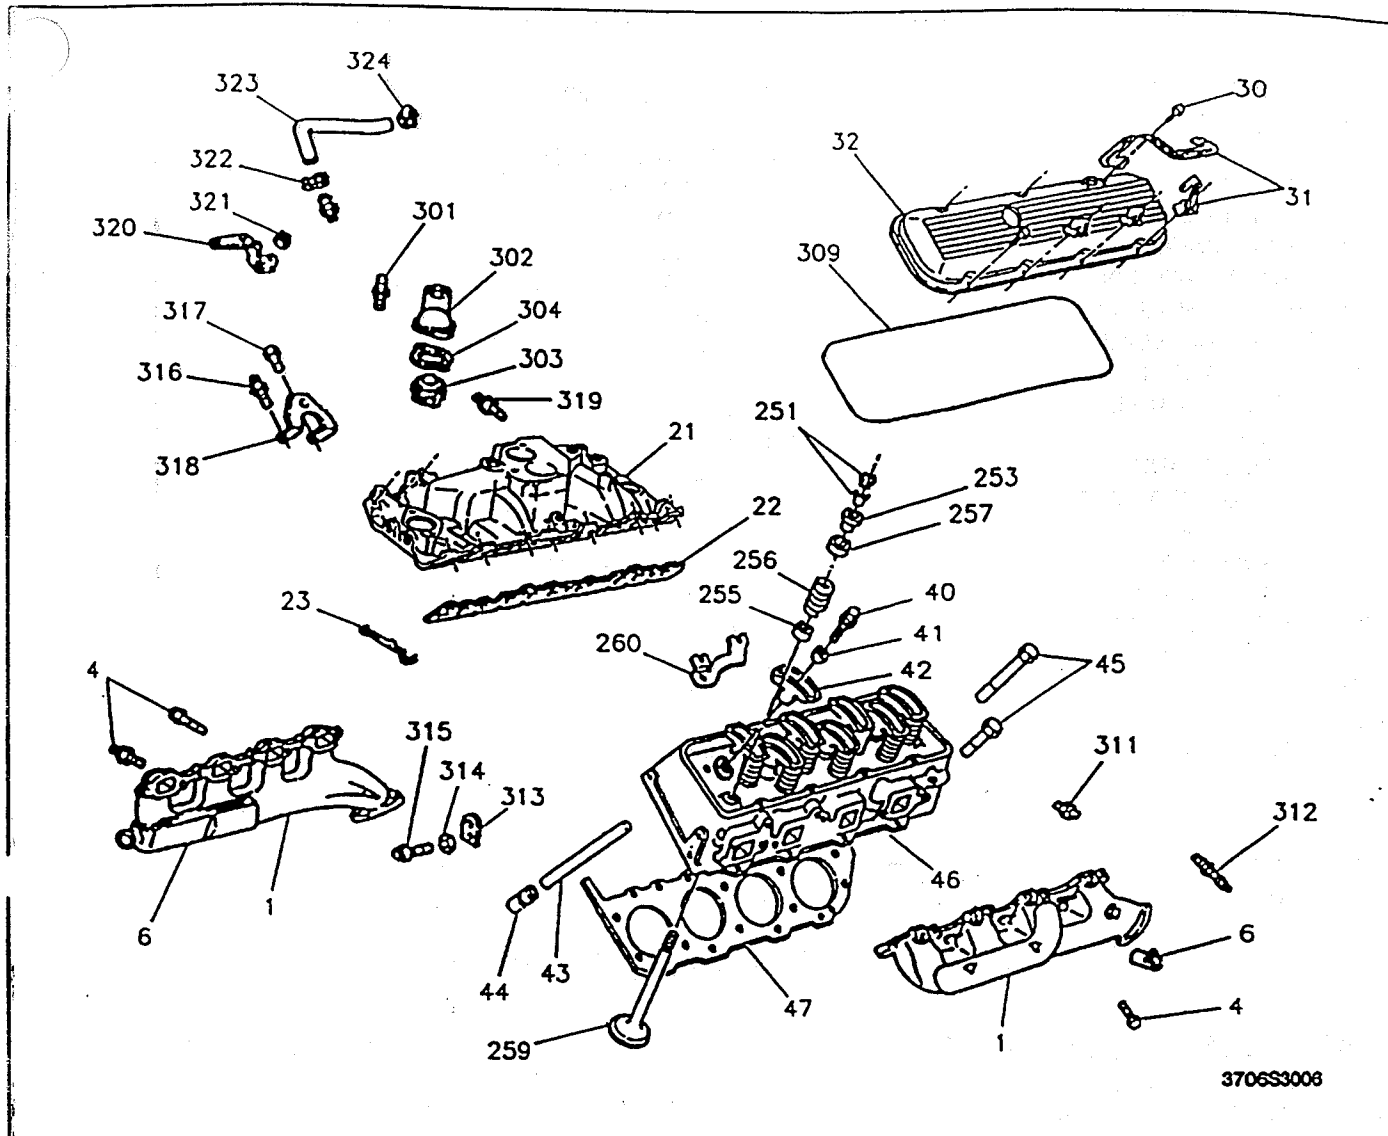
Cylinder Head, Manifolds, and Components (7.4L Engine)
